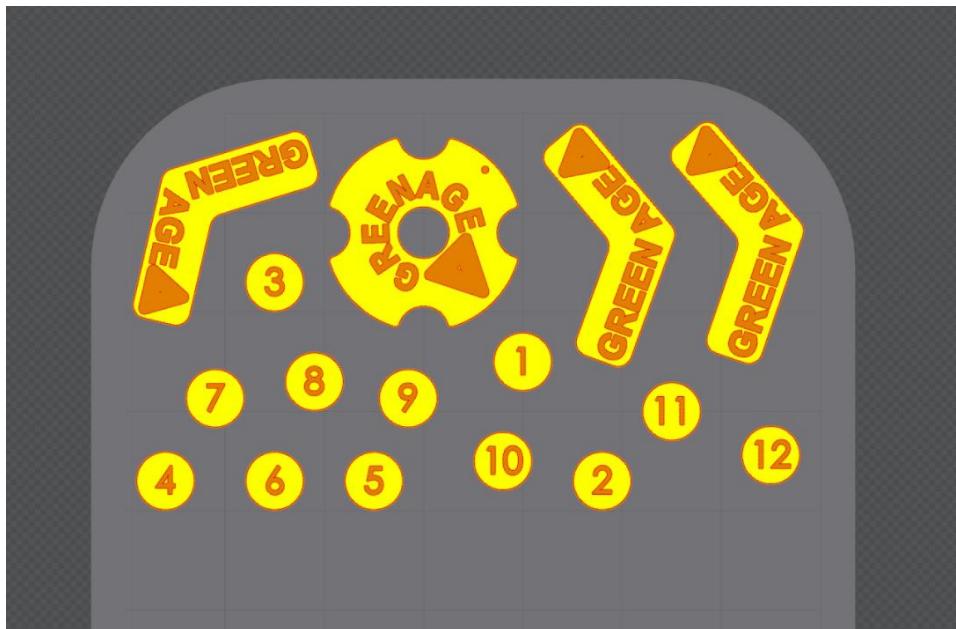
Build plate setup for build 6.1. The order of the coupons on the build plate is shown. Different types of samples were printed: 3 V-shaped parts, one complex shaped toroidal part and 12 long cylinders.
